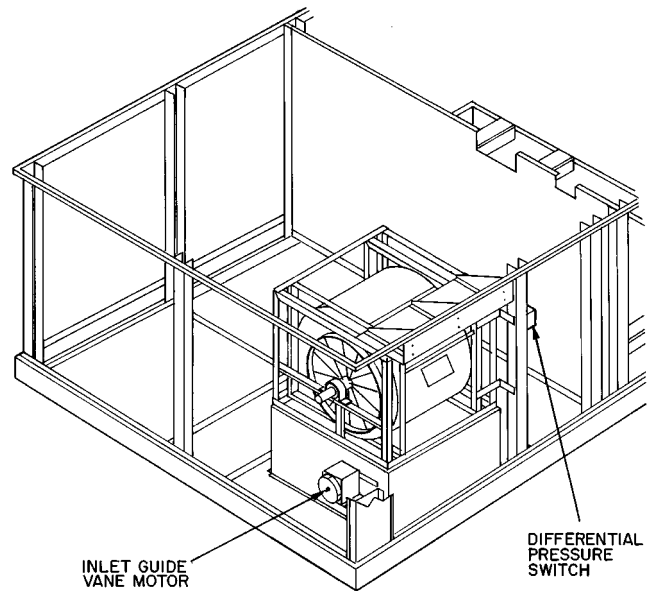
Location of Differential Pressure Switch and Inlet Guide Vane Motor (50DK024-030 Units)
